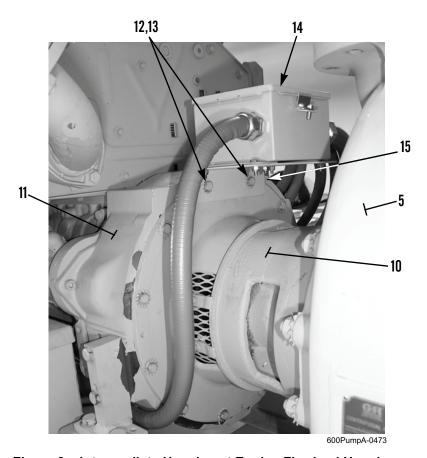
Intermediate Housing at Engine Flywheel Housing.
